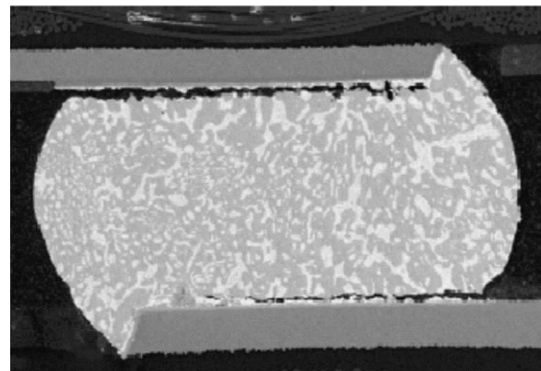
Crack propagation at top and bottom edges of solder ball [23]
